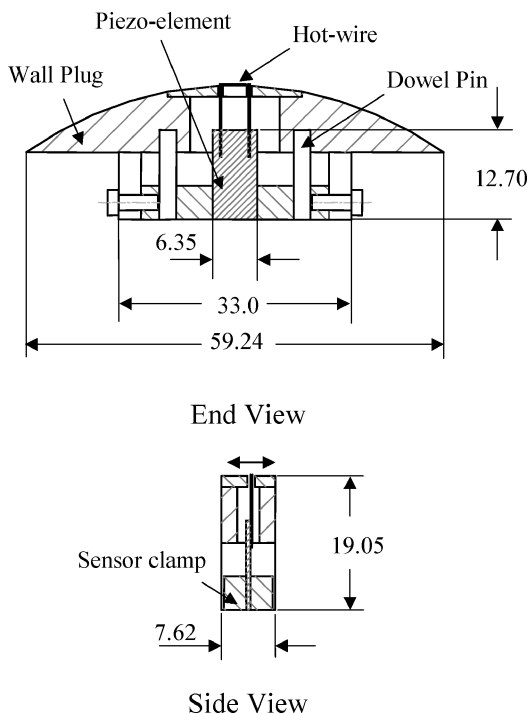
Drawing of the sensor plug (dimensions in millimeters).
